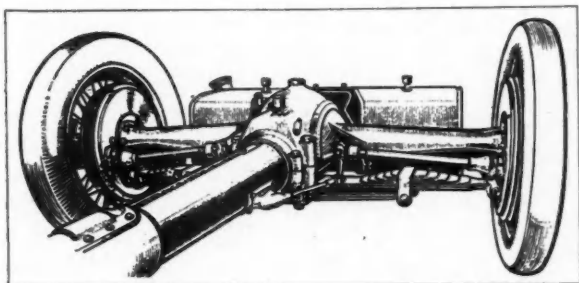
Austrian Daimler rear oscillating axle, front view (from *The Motor*)
